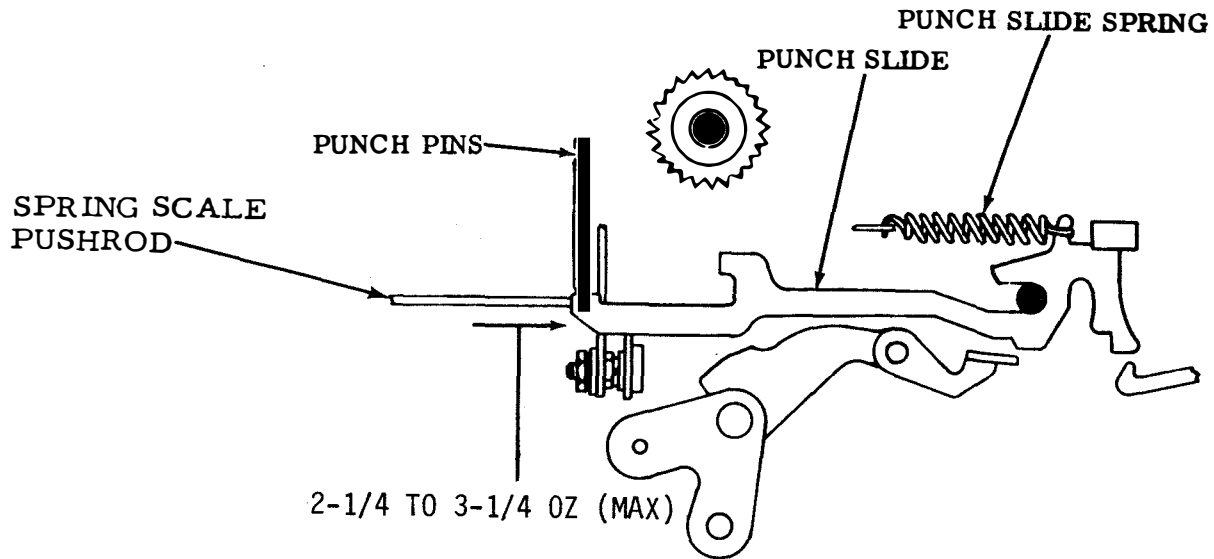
Punch Slide Spring (Chadless Tape Mechanism)
